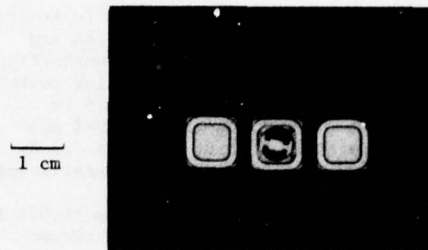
20 MHz Ceramic Flat Pack Covers and Frame/Resonator Assembly Prior to Final Assembly
